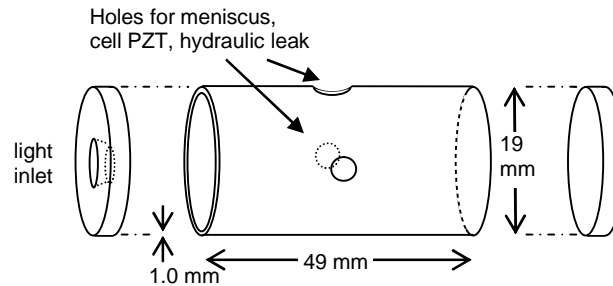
Macor sleeve insert and end pieces used to convert the cell into an integrating cavity.
